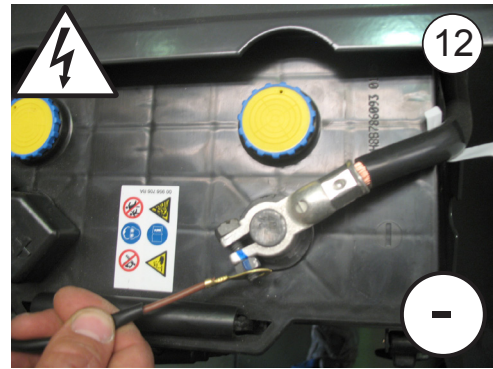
## DETAILED INSTRUCTIONS ON POWER CABLE CONNECTION
